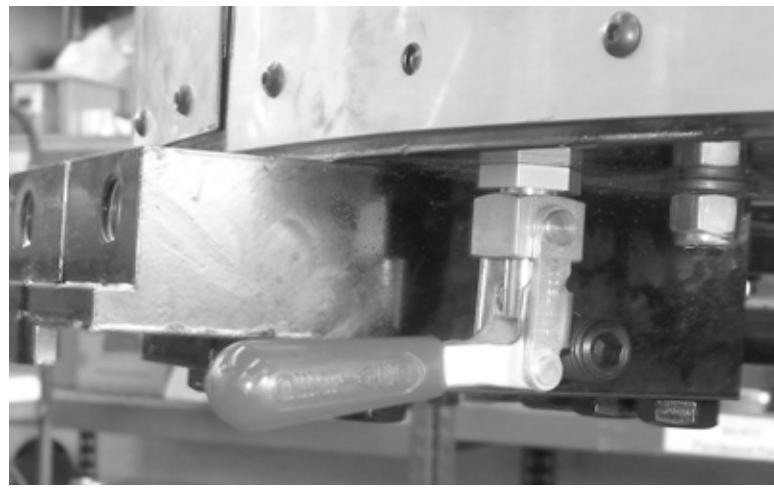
Swivel the frame locking levers toward the outside of the frame to lock the stationary and rotating rings together.
